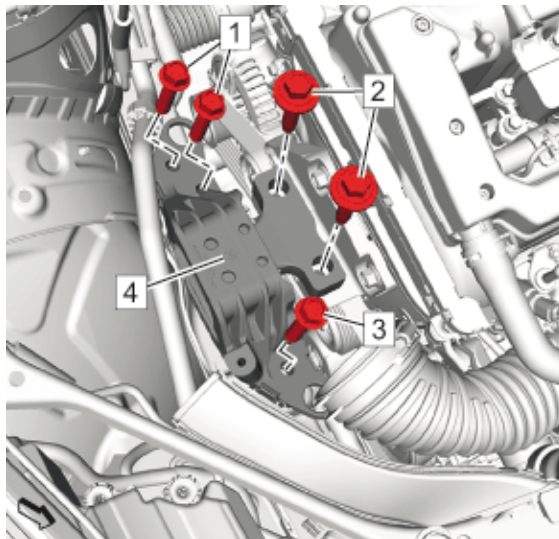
Engine Mount, Engine Mount Bracket And Bolts
